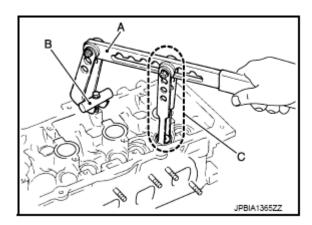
Compressing Valve Spring Using Compressor Courtesy of NISSAN NORTH AMERICA, INC.
